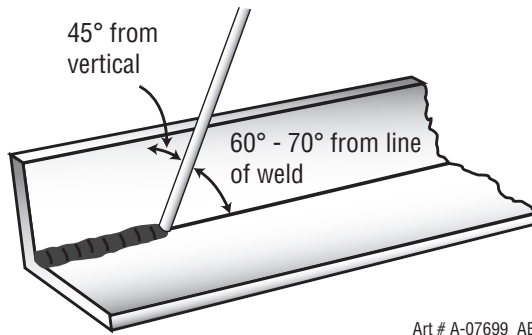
Electrode Position for HV Fillet Weld
